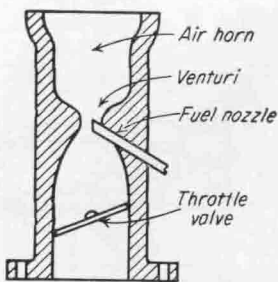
Simple carburetor consisting of air horn, fuel nozzle, and throttle valve.
